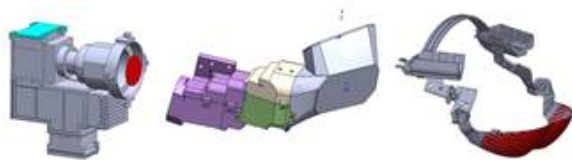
Optical components(Lighting optical system, Imaging optical system and visor assembly)
